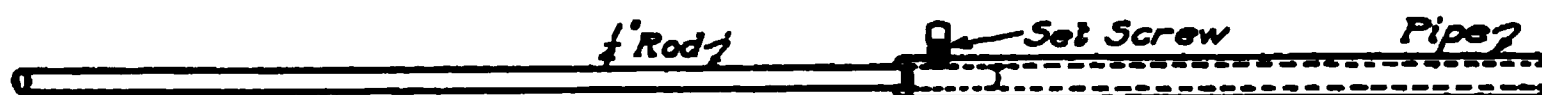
Simple Measuring Rod for Truing-Up Wheels
